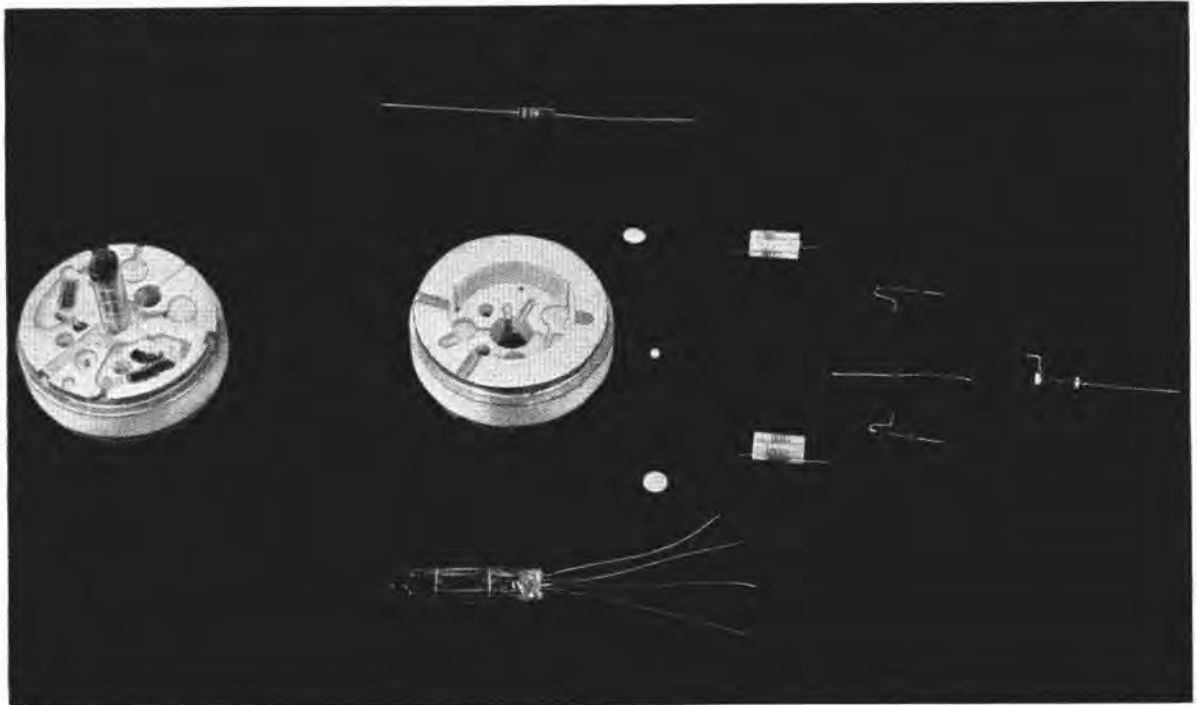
Oscillator assembly using ceramic block (Globe-Union, Inc., photograph).
